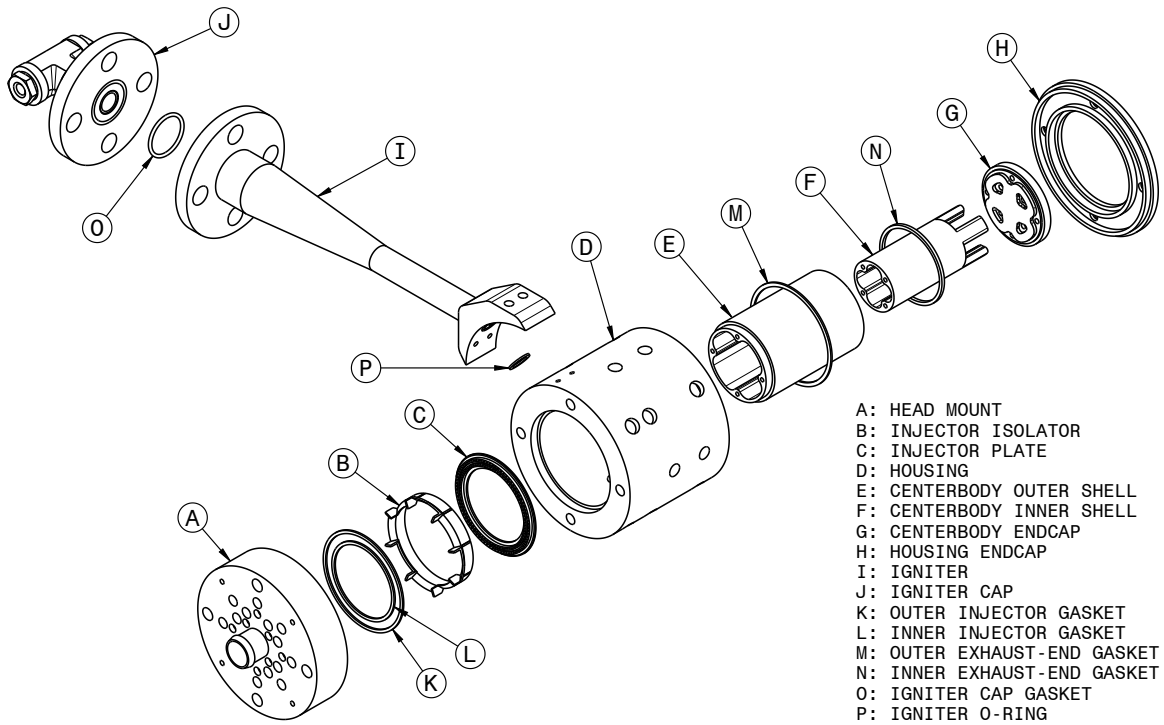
Exploded assembly view of RDE “Arthur”.
